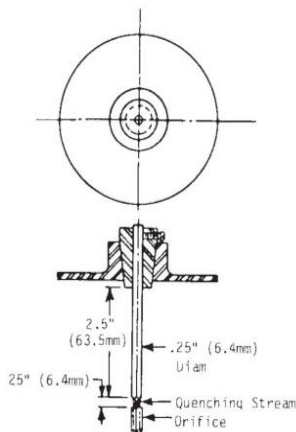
Support for Smaller-Size Specimens, Showing 0.25-in. (6.4-mm) Specimen in Position
